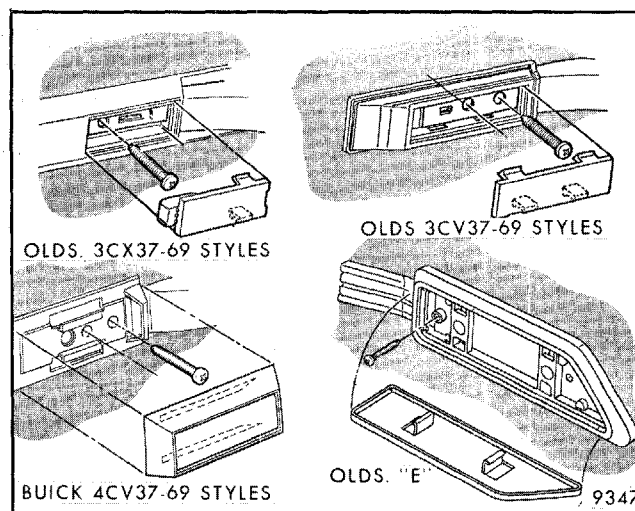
Typical Door Pull Handle Attachment - Buick "C" and Oldsmobile "C and E" Styles
